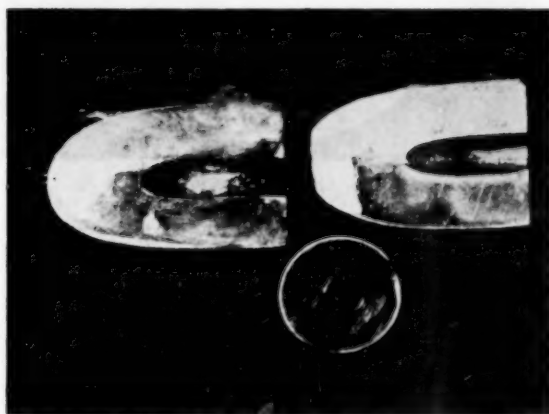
DEFECTIVE AISI TYPE 304 STAINLESS-STEEL ELL CAUSED BY FORGING AT TOO LOW A TEMPERATURE
